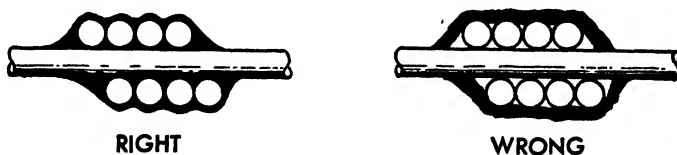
Solder melted by hot wires flows into all spaces, giving a good joint. Hot solder applied to cold wire results in a poor joint.
